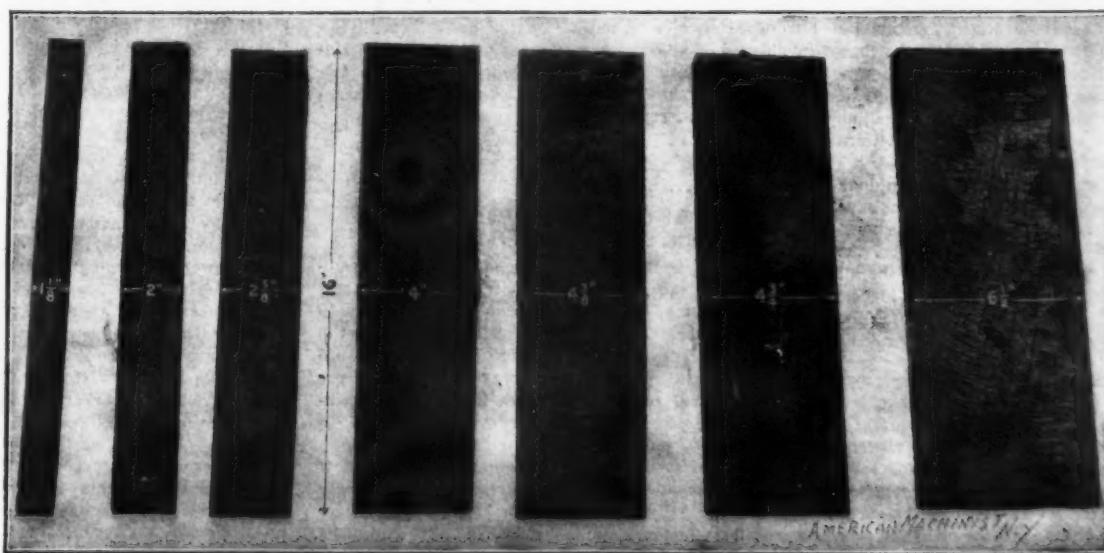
CUT SURFACE OF STEEL SLABS, FROM $1\frac{1}{8}$ TO $6\frac{1}{8}$ INCHES THICK, CUT WITH MACHINE IN FIG. 4.
